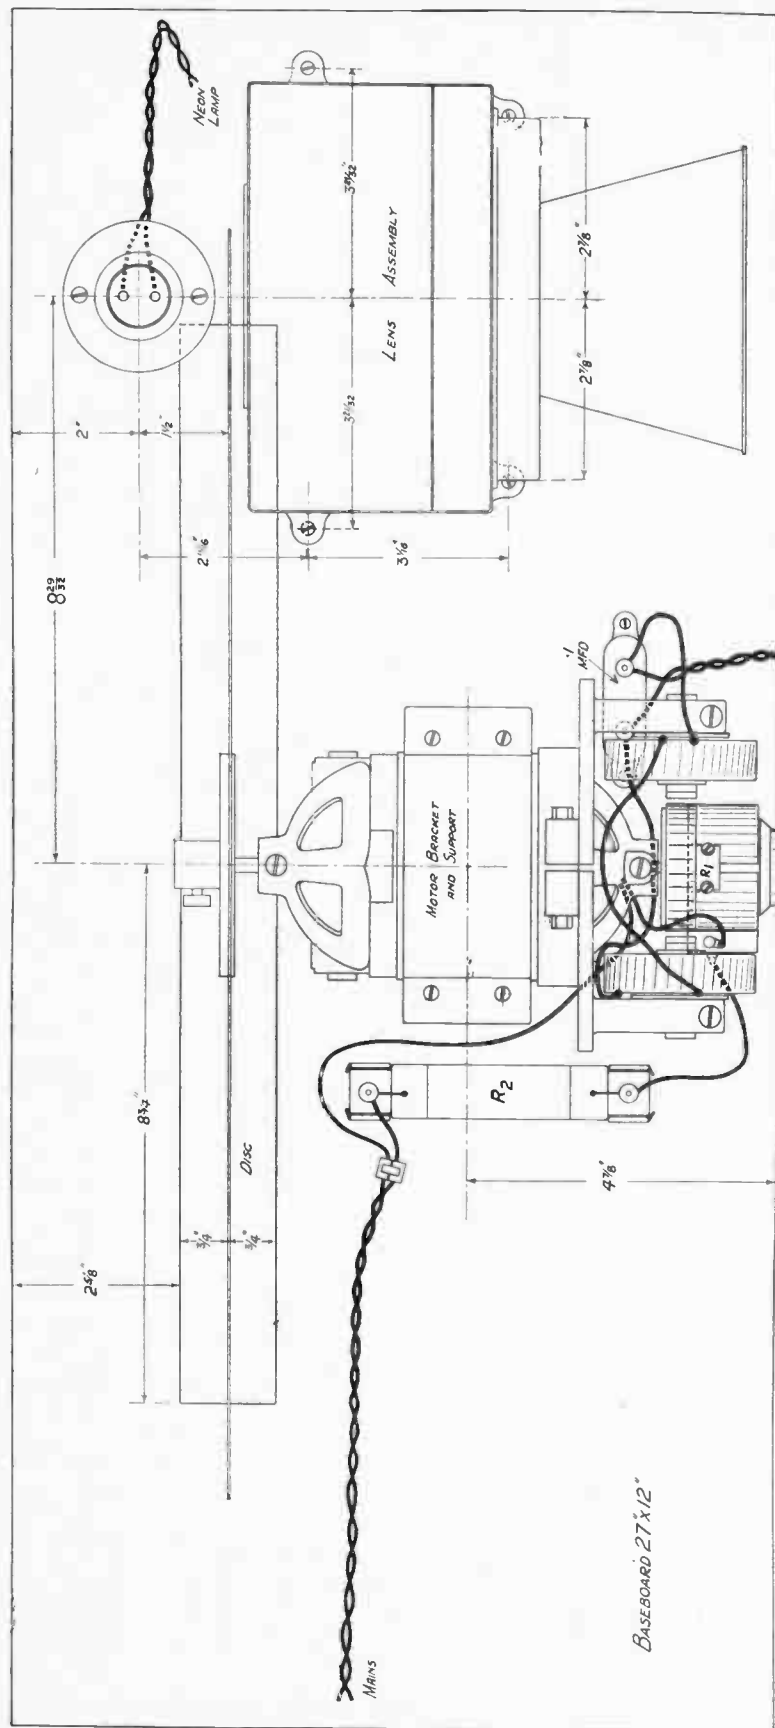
A dimensioned baseboard layout and wiring diagram which should be adhered to exactly by the constructor when making up his apparatus.
